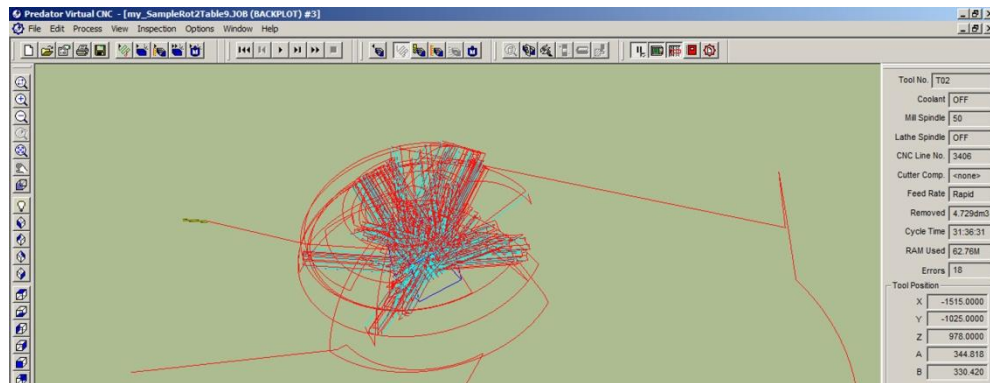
Tool path trajectory of an output code for 5-axis milling machine.
